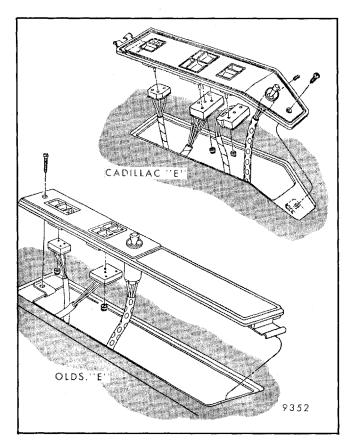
Door Armrest Switch Cover Plate and Remote Mirror Cable Attachment - E Styles
